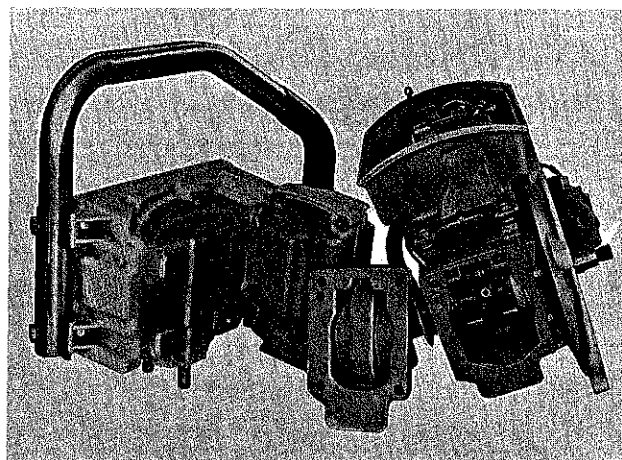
Fuel tank and stuffer, removed to open the crankcase for removal of the connecting rod cap.
